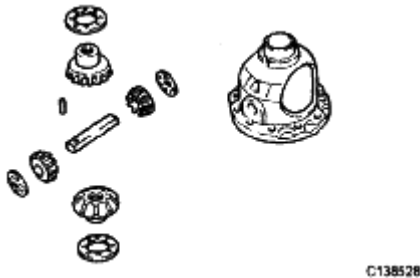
Identifying Front Differential Pinions, Pinion Thrust Washers And Front Differential Side Gears
